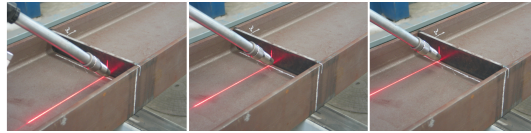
Illustration of the three point approach for the detection of the welding joint
